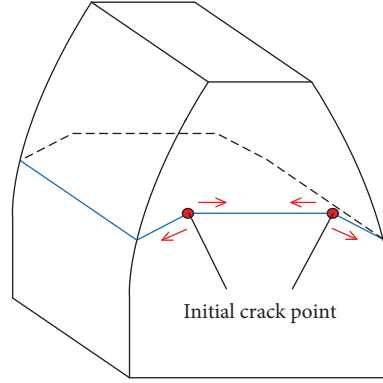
Propagation path of tooth interior fatigue fracture.
